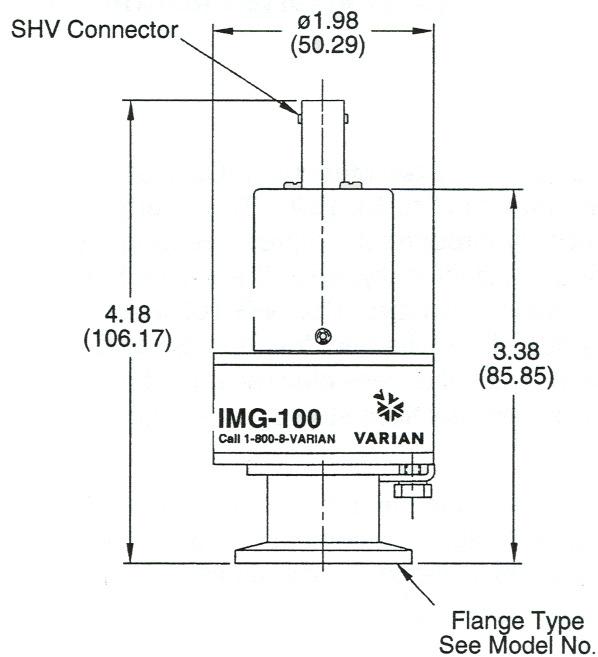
Outline Drawing, IMG-100 Inverted Magnetron Gauge
